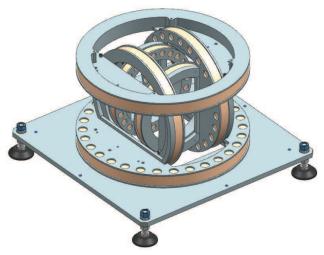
Drawing of the assembled system of 3D Helmholtz coils.
